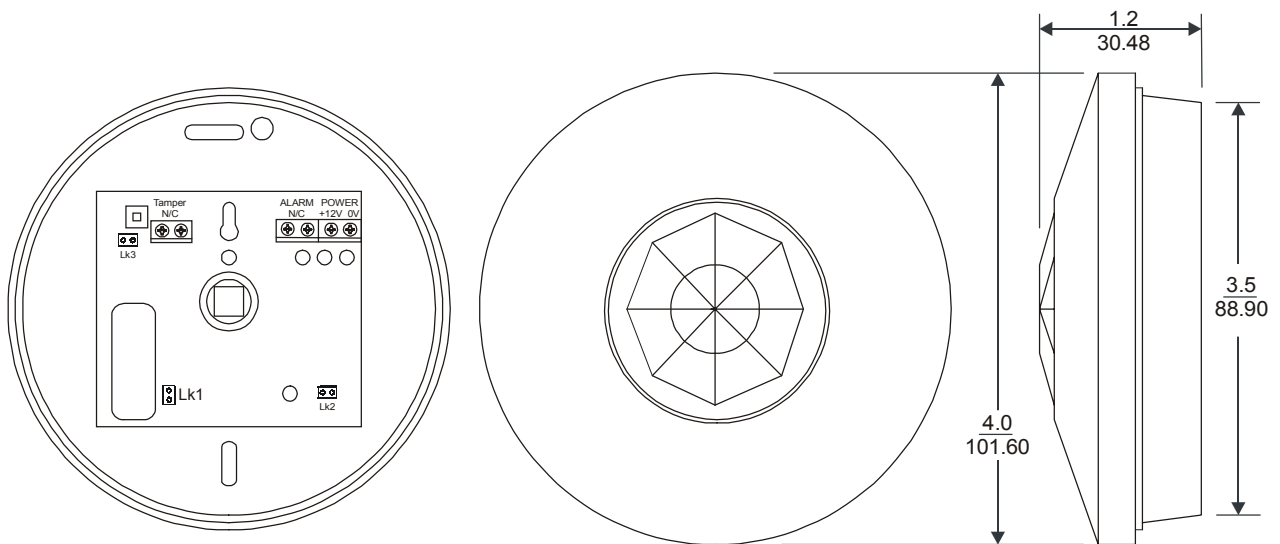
MRC19-PIRC Wiring Connections and Dimensions, in. (mm)
